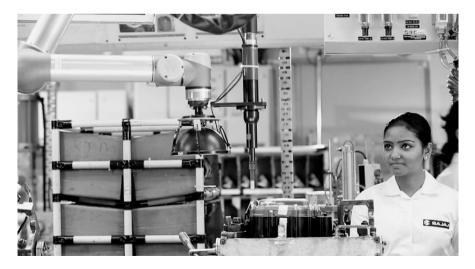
Cobot setup used by Bajaj Auto for automotive assembly tasks (adapted from UR, 2016c).
